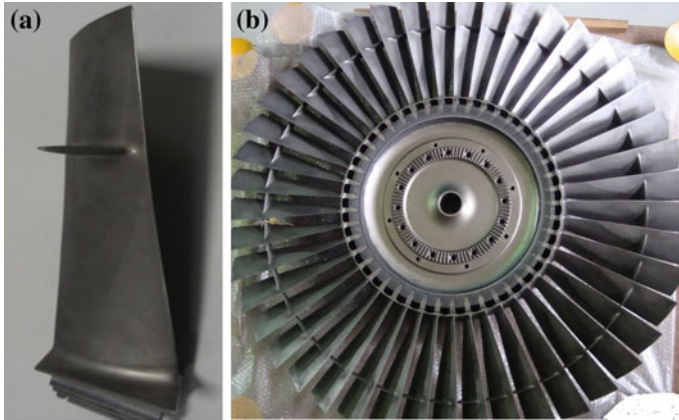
Refurbished compressor module. a individual blade with snubber abutment face coated with DSC-sprayed WC-17Co coating, and b the assembled module
